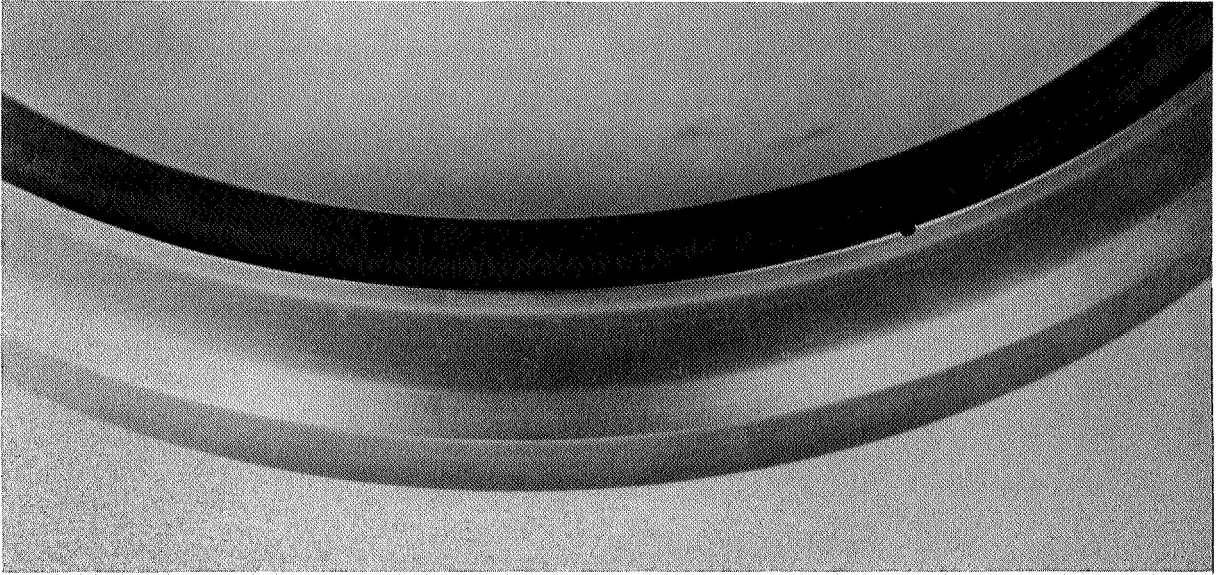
INNER RING BALL PATH - BEARING S/N 18
